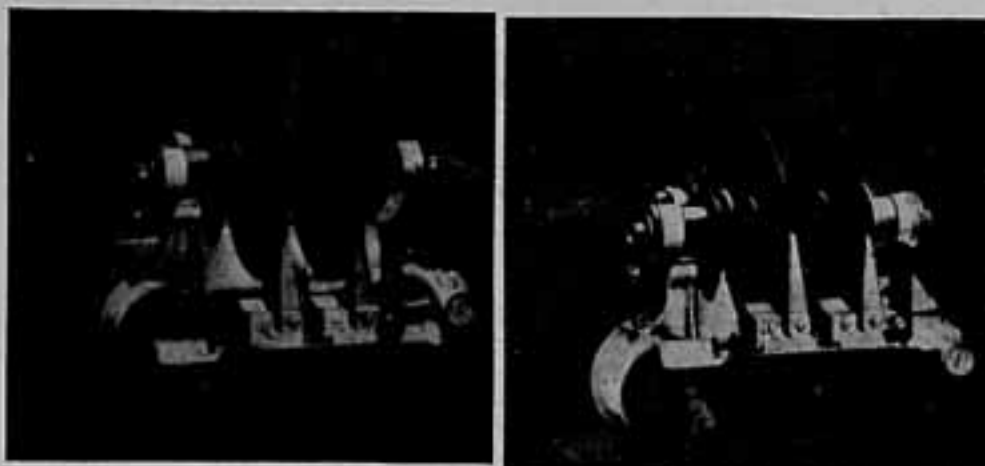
Cutting-off mechanism in cigarette machinery incorporating Elektron magnesium castings. It is claimed that the use of these ultra light castings increased output from 300 to 1000 per min.
